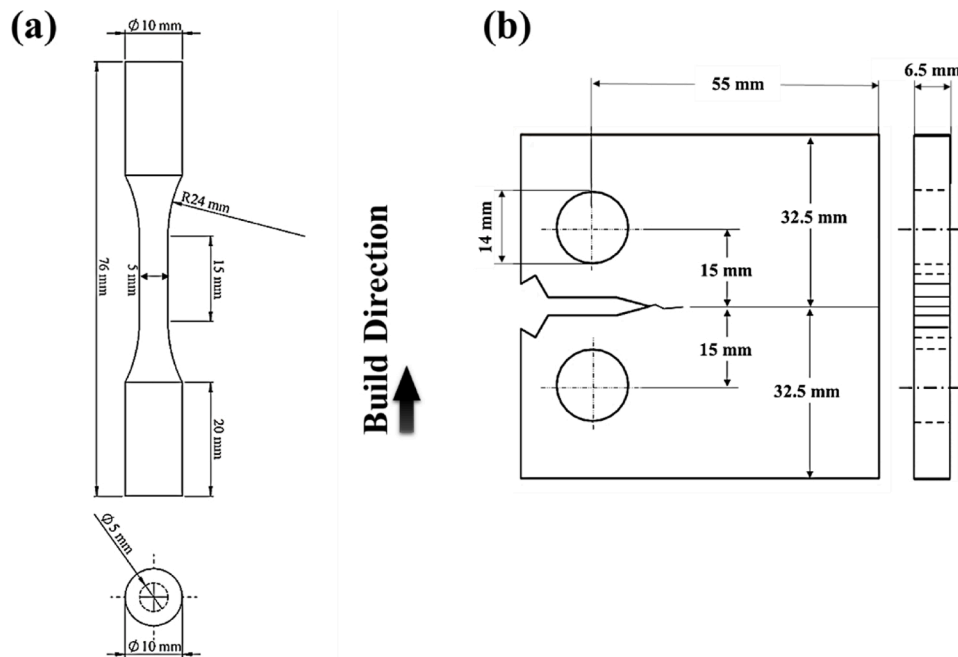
Drawings of (a) round axial fatigue specimens with a uniform gage section, and (b) compact tension (CT) specimens following ASTM E647 standard [47].
